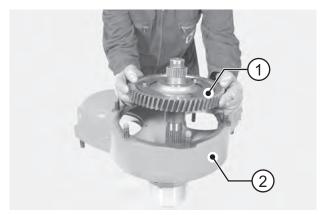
Fit the complete input shaft assembly (1) into the reduction unit (2) housing.
